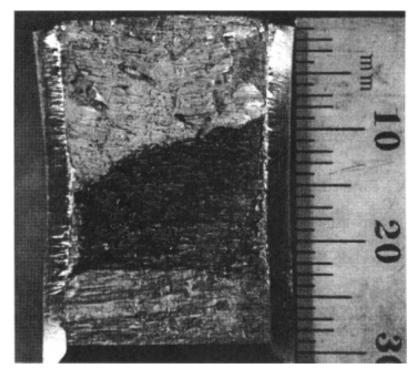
Fracture surface of unaged weld metal PWWO tested at 290°C
